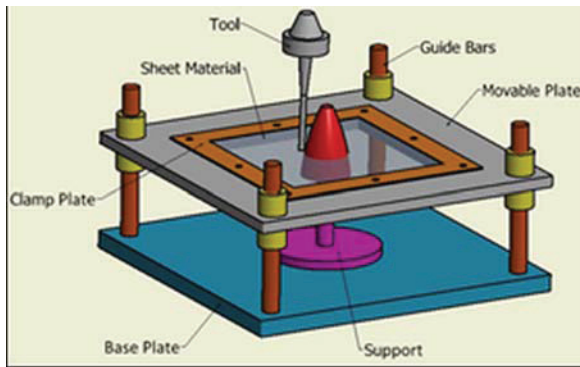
CAD model of Jig and fixture system for fixture system for TPIF process.
